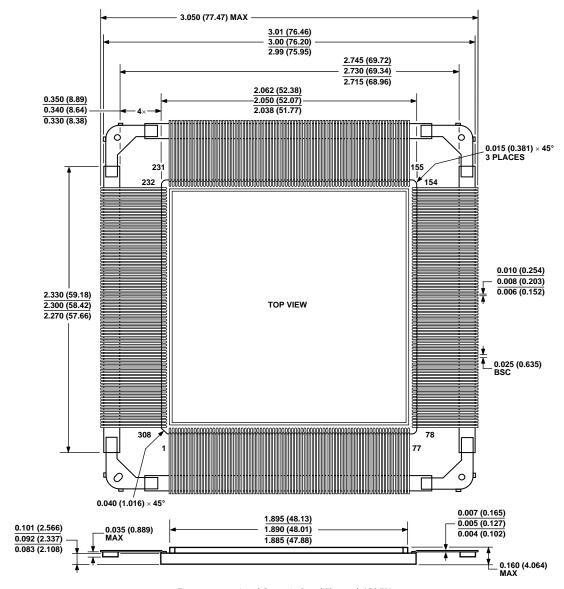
308-Lead Ceramic Quad Flatpack (CQFP) (QS-308) Dimensions shown in inches and (millimeters)
